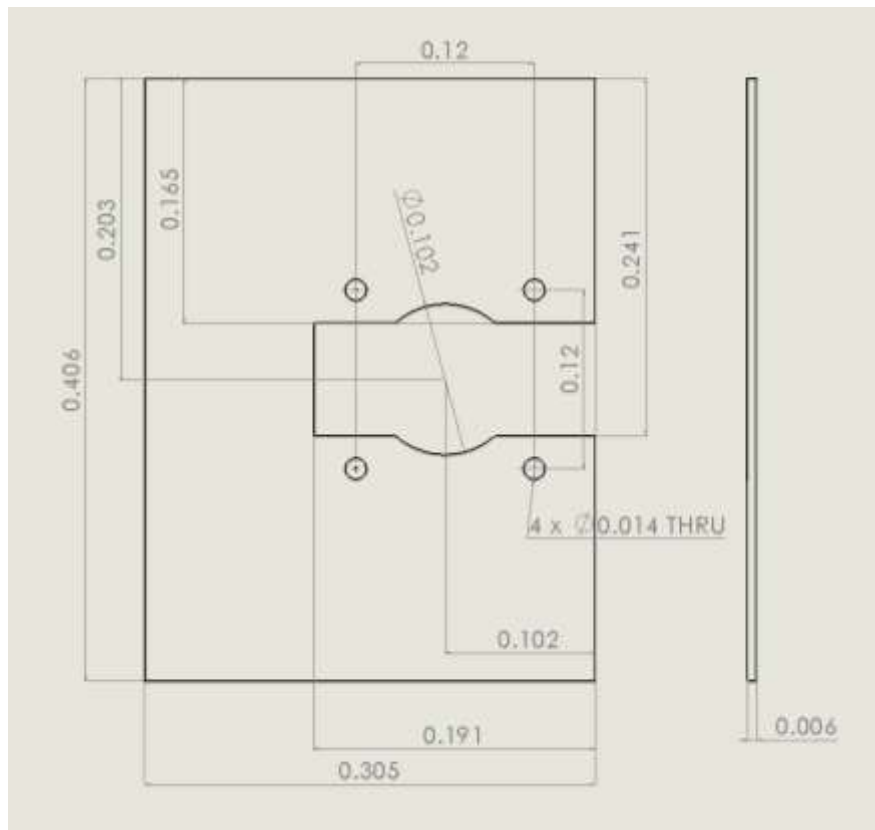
Schematic of Target Holder (Dimensions in m)
